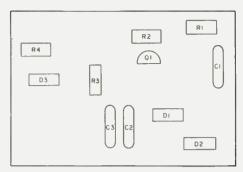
PC card layout for Mark II. Complete kit with all components, PC board, and wire harness, but without meter (available from Hy-Gain) is \$8.00 from Melco, P.O. Box 26, Marissa IL 62257.
